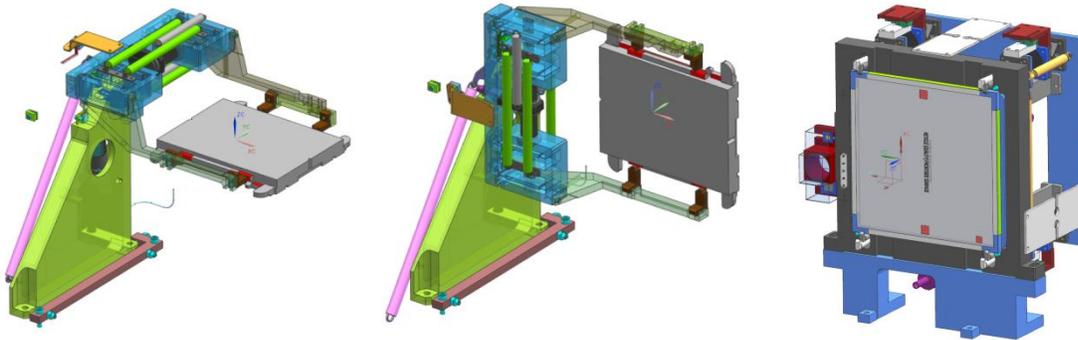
Left: Sample rotation unit accepts sample holder horizontally from vacuum handler. Center: sample rotation unit offers sample holder vertically to chuck. Right: Chuck holds photomask ready for exposure.
